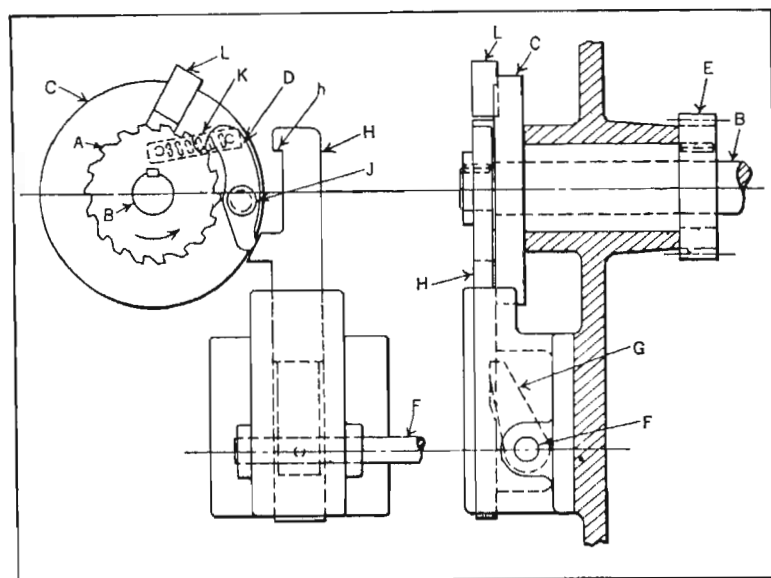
Mechanism by which Rotating Shaft B Imparts One Revolution to Gear E when Shaft F Releases Latch G
